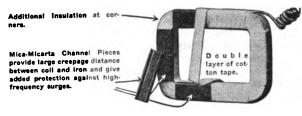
Machine-Wound High-Voltage Coil of Distributed-Shell (Type S) Transformers (Partially Complete, Showing Micarta Channel Pieces)
